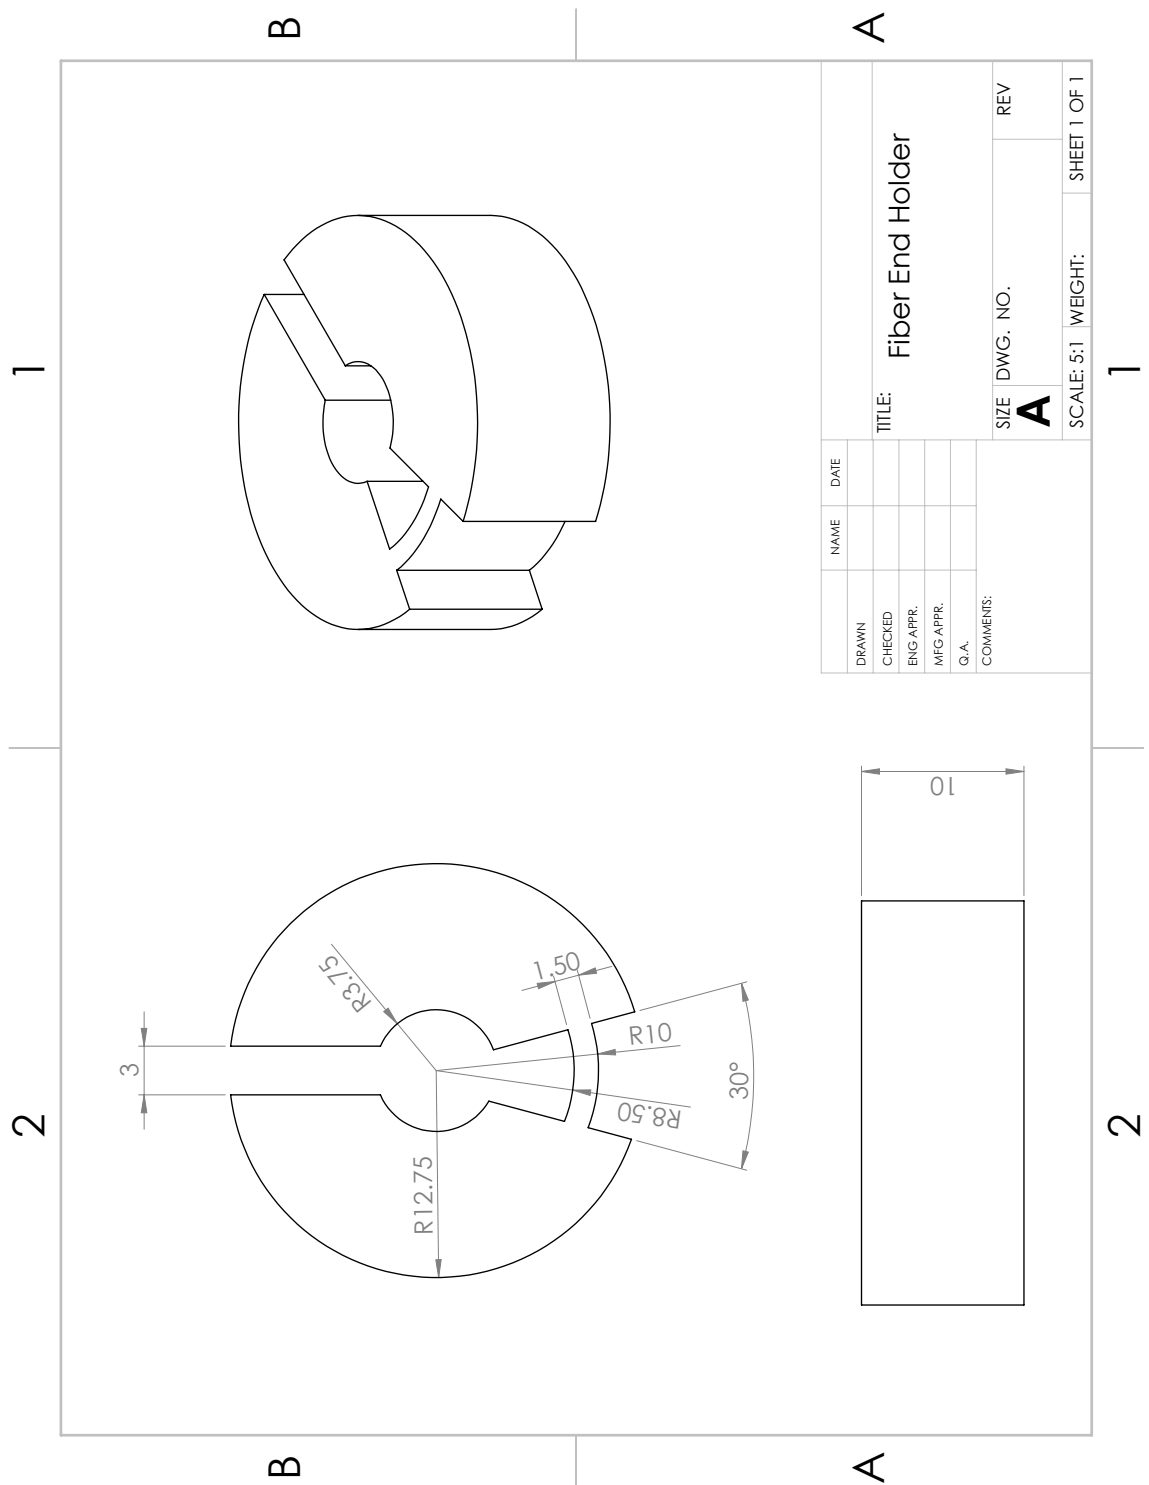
Mechanical drawing of the mount used to insert the end of the optical fiber into the spectrometer.
